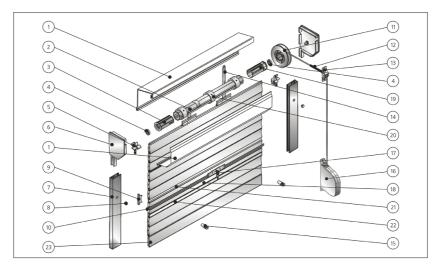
Roller shutter option complete with KPU/R lock profile
